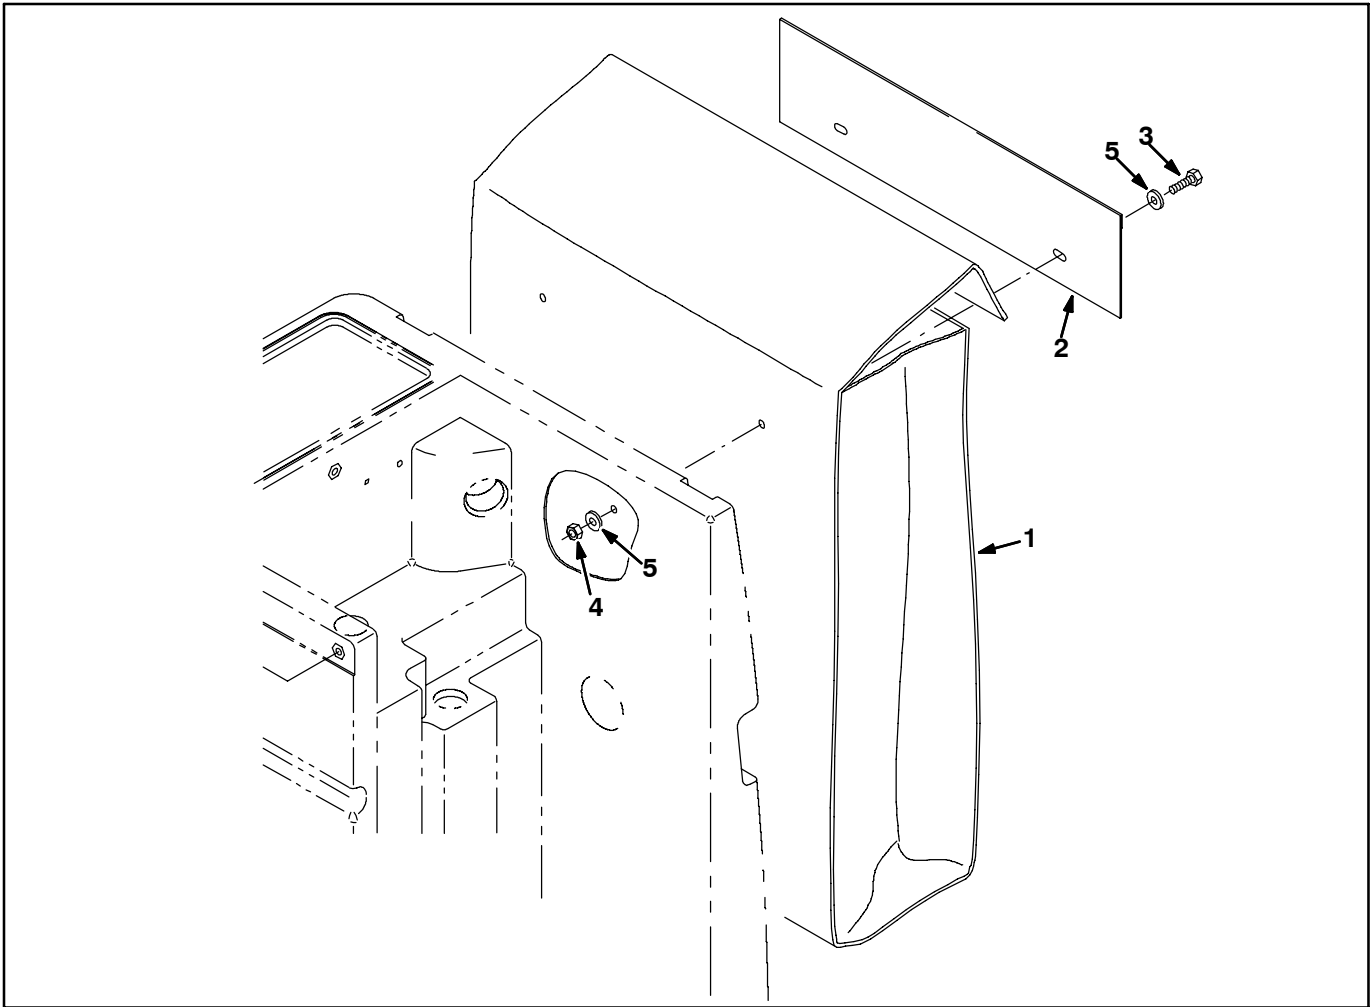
POWER WAND BAG MOUNTING GROUP
